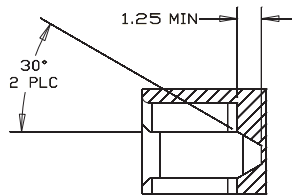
Slimline Device plug connector interface dimensions (Section B-B)
